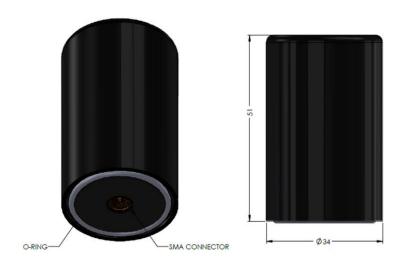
Helix antenna mechanical layout. dimensions are in mm
